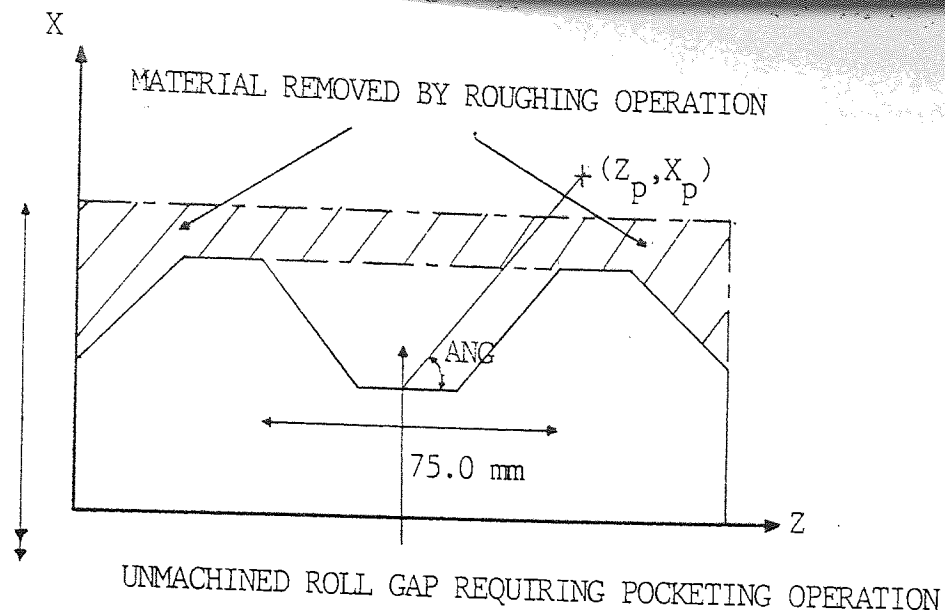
ROLL PROFILE REQUIRING BOTH A LEFT HAND AND A RIGHT HAND POCKETING TOOL
